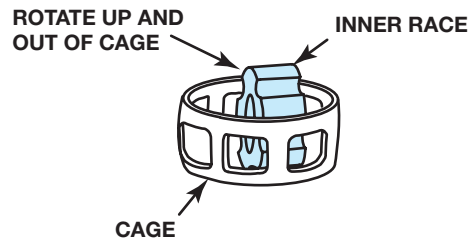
Procedure to disassemble a Rzeppa CV joint; special tools are available to swing the inner race for ball removal and installation.
